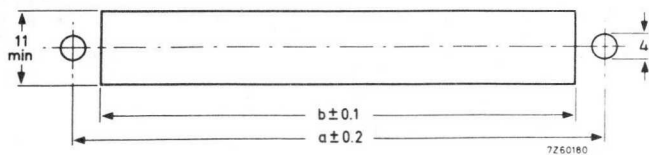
Panel mounting; for dimensions a and b, see Table 2.
